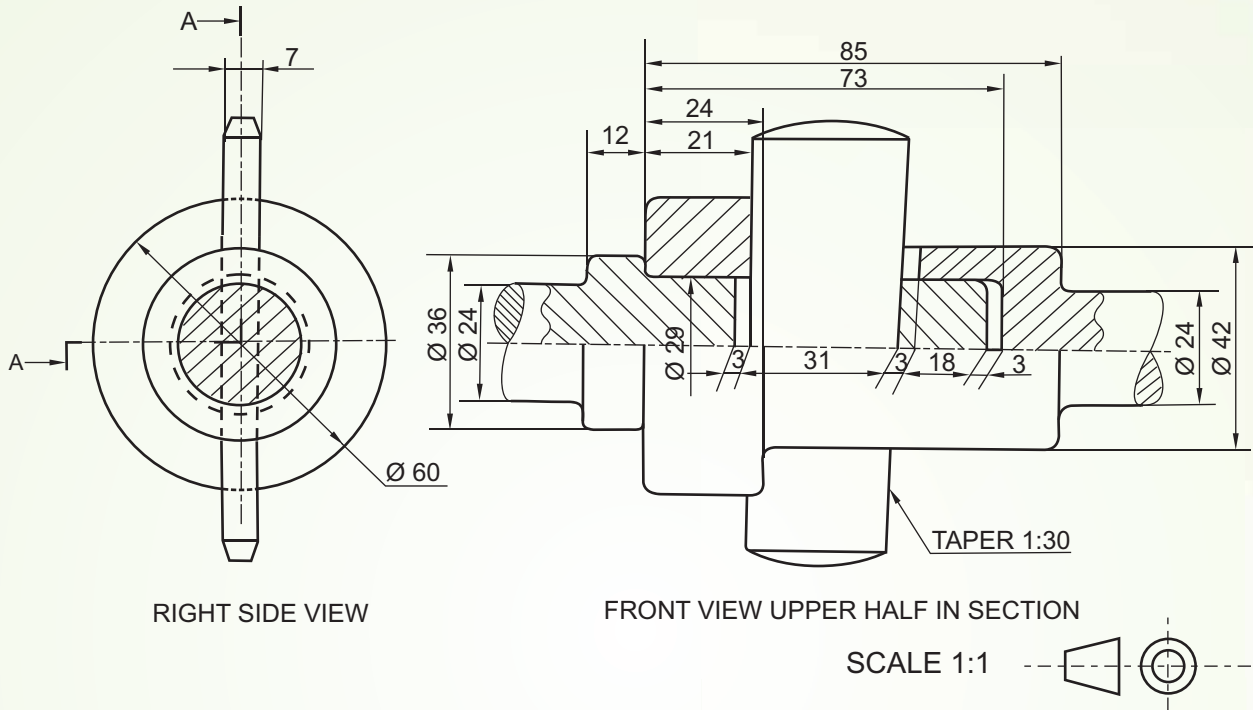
DETAILS OF A SOCKET AND SPIGOT COTTER JOINT
